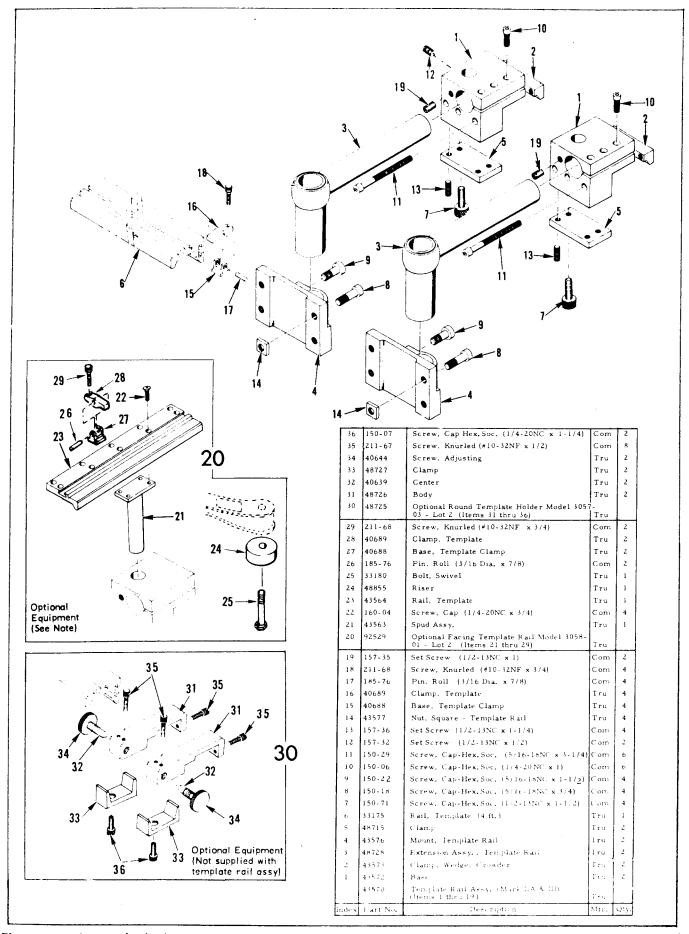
Exploded View and Replaceable Parts List for #43570 Universal Template Rail
